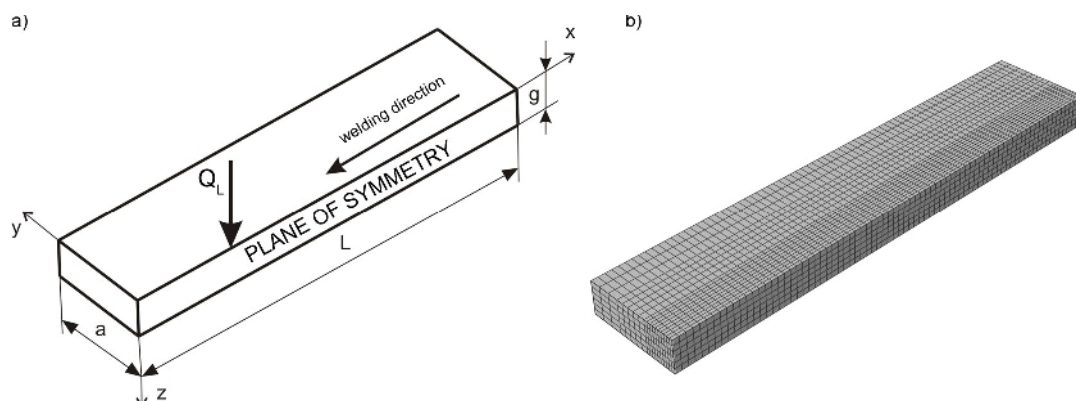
Laser beam welding of butt-joints: a) scheme of considered system, b) finite element mesh
